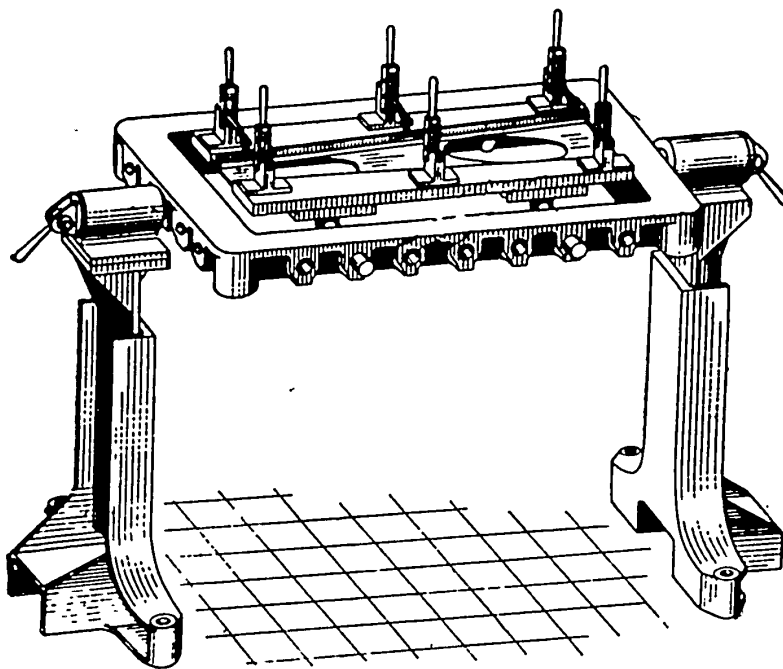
Typical Construction of a Fixture for Assembling, Drilling and Riveting of Airplane Ribs
